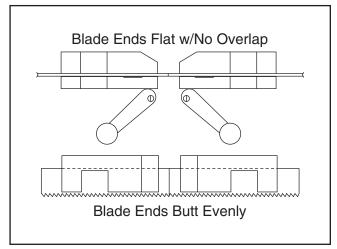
Blade ends correctly secured in welding clamps.
